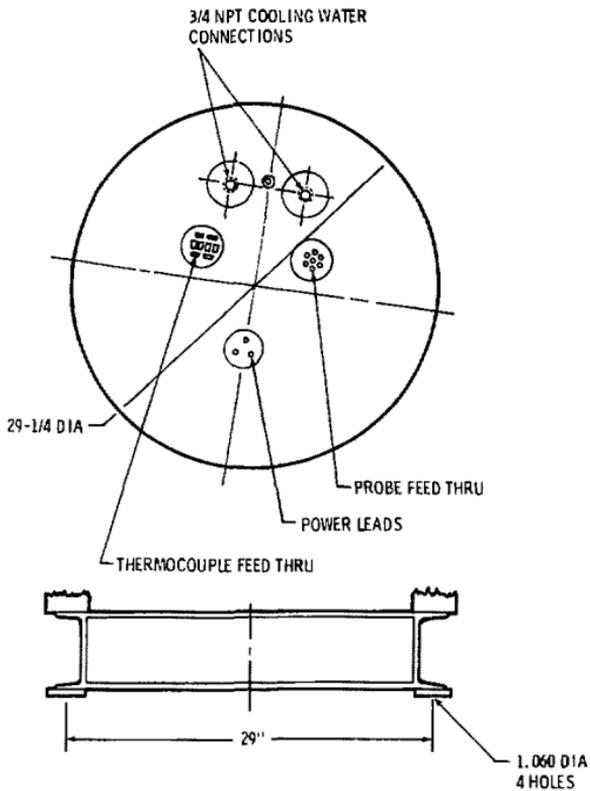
Cross-Sectional Dimensions of the Helium Pump
